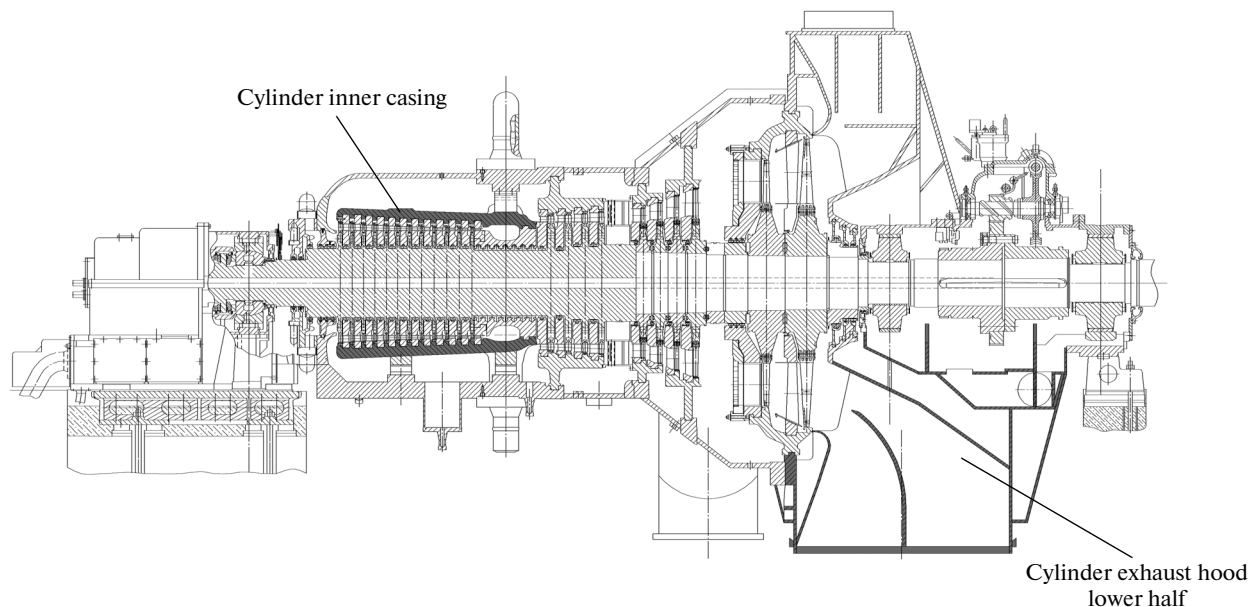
General view of the turbine cylinder exhaust hood lower part.
